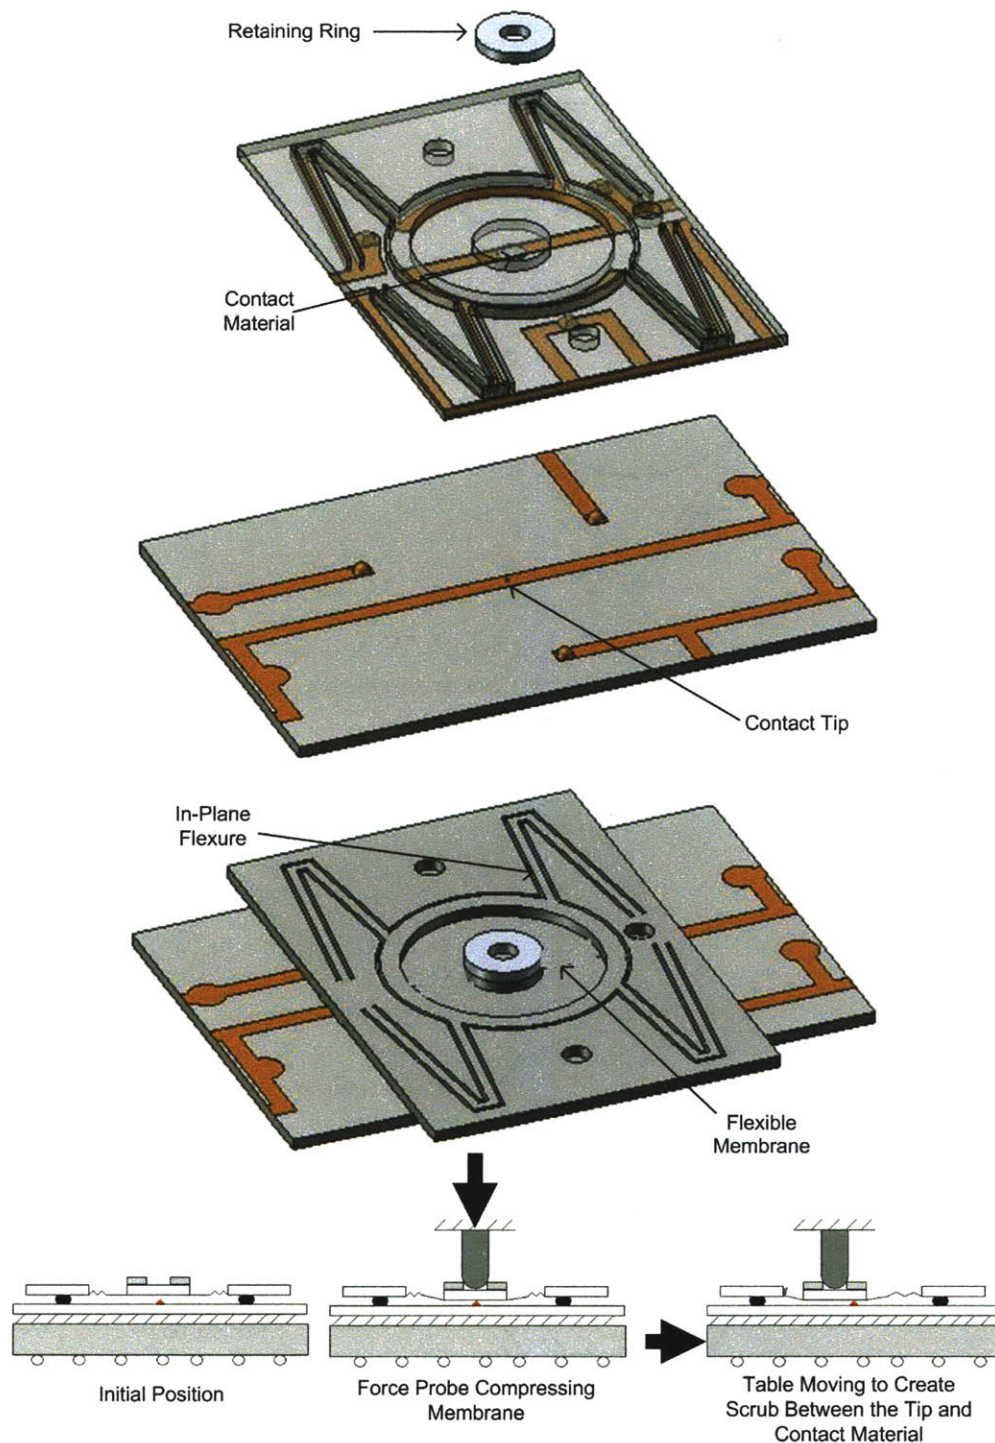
Top: An exploded view of the final two-coupon system. Middle: A collapsed view of the final two-coupon system. Bottom: A representative cross section showing how the two-coupon system imparts scrub and force. The in-plane flexure is represented as a simple spring in this depiction.
